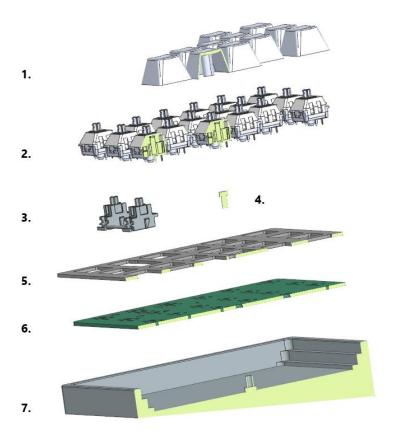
Explosion view of all components. Figure is a section of the keyboard.
